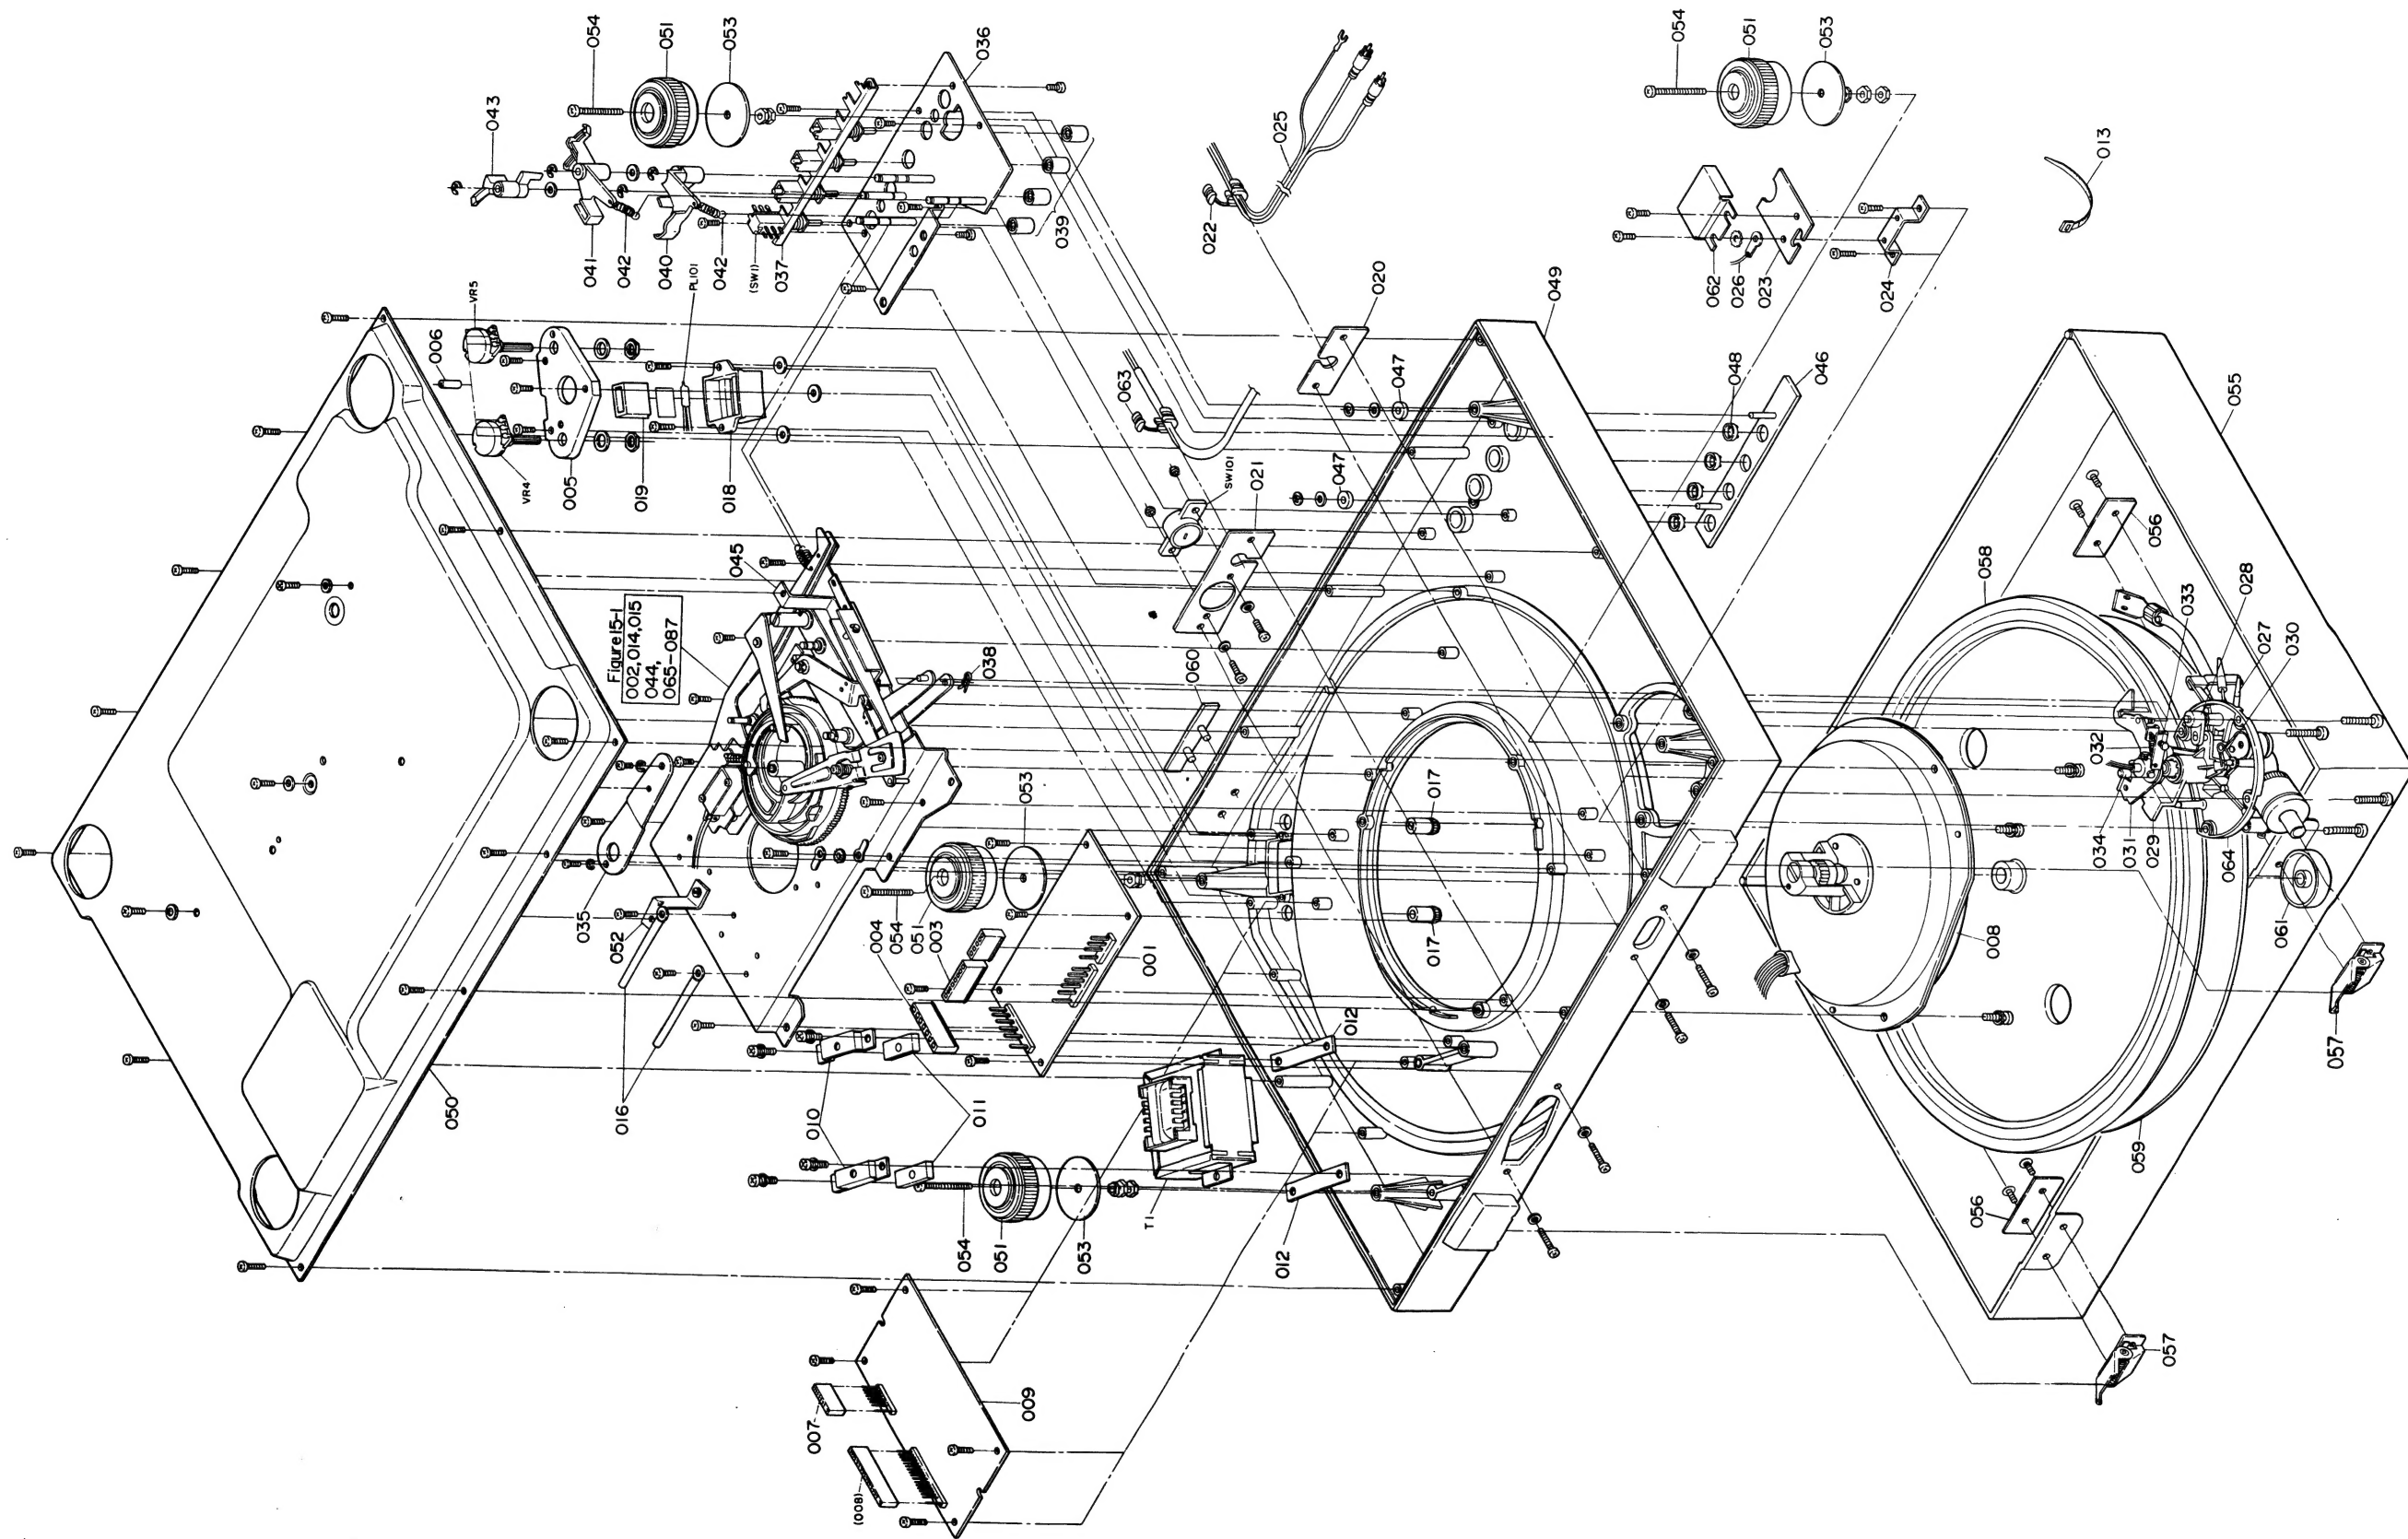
PLAYER EXPLODED VIEW (Cabinet)
